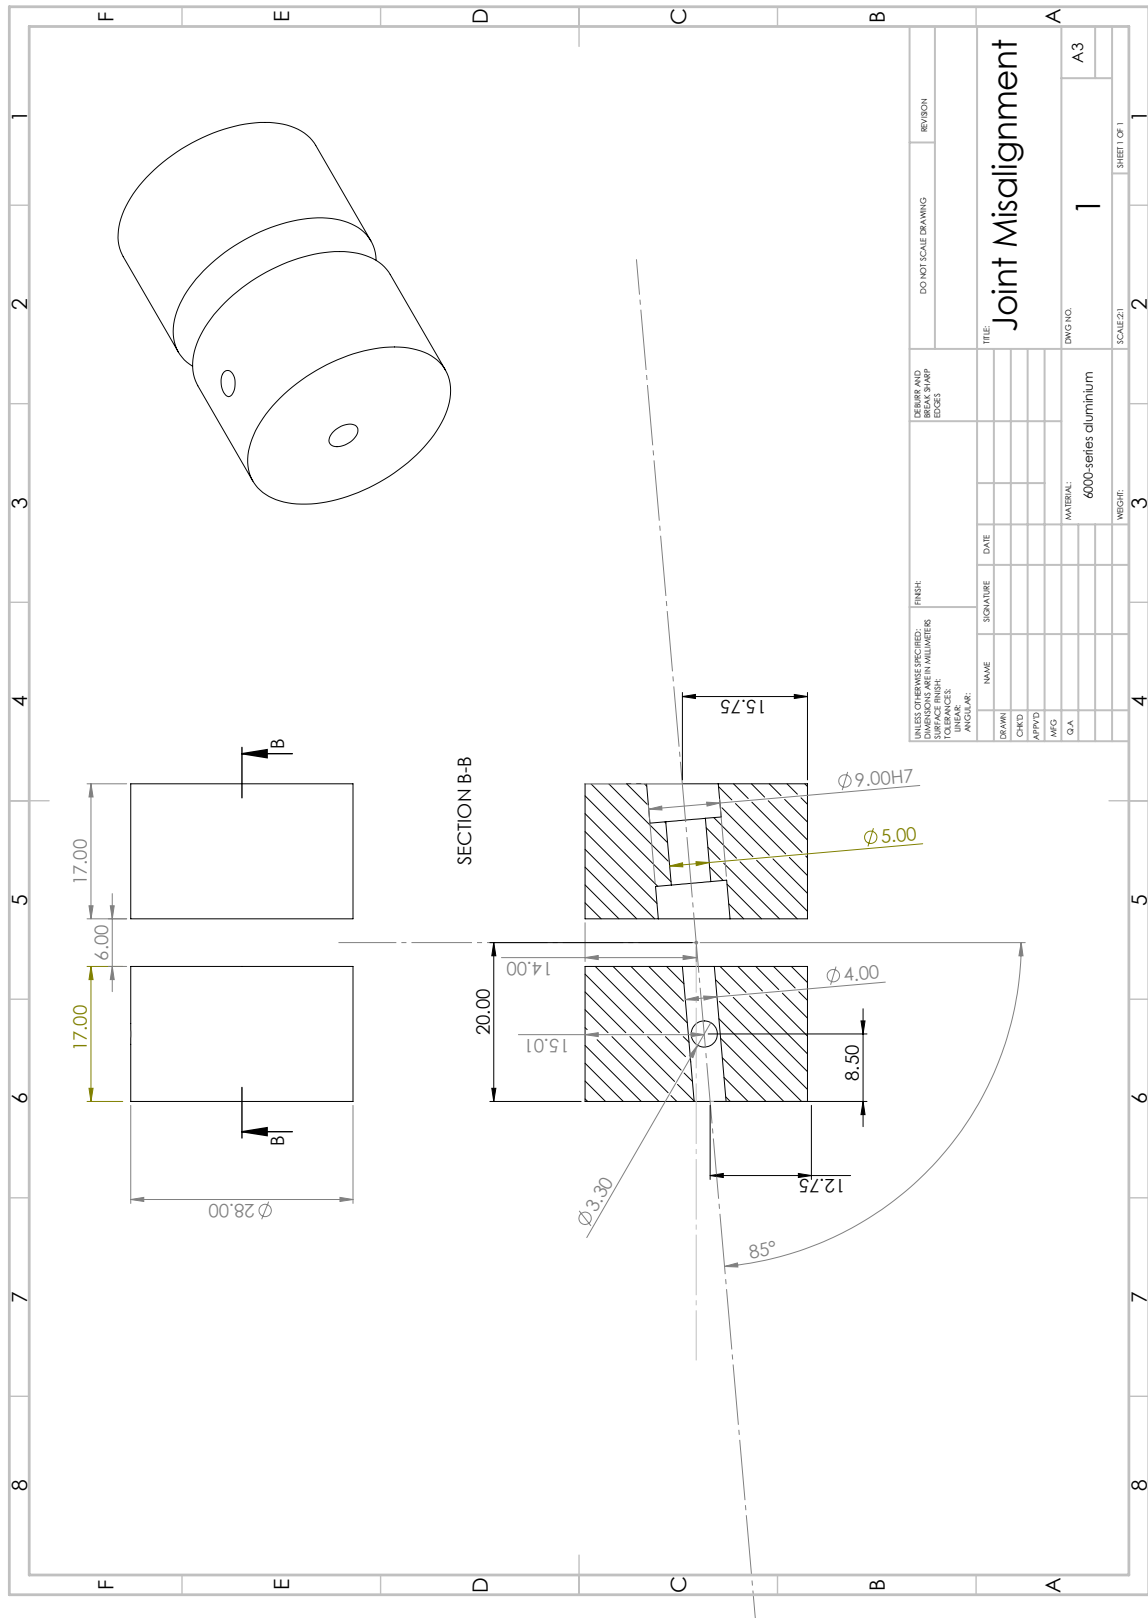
Technical drawing of joint misalignment cylinders. Ball bearings were glued into place using locktite. Machined out of 6000-series aluminium. Ball bearings were glued into place using locktite.
